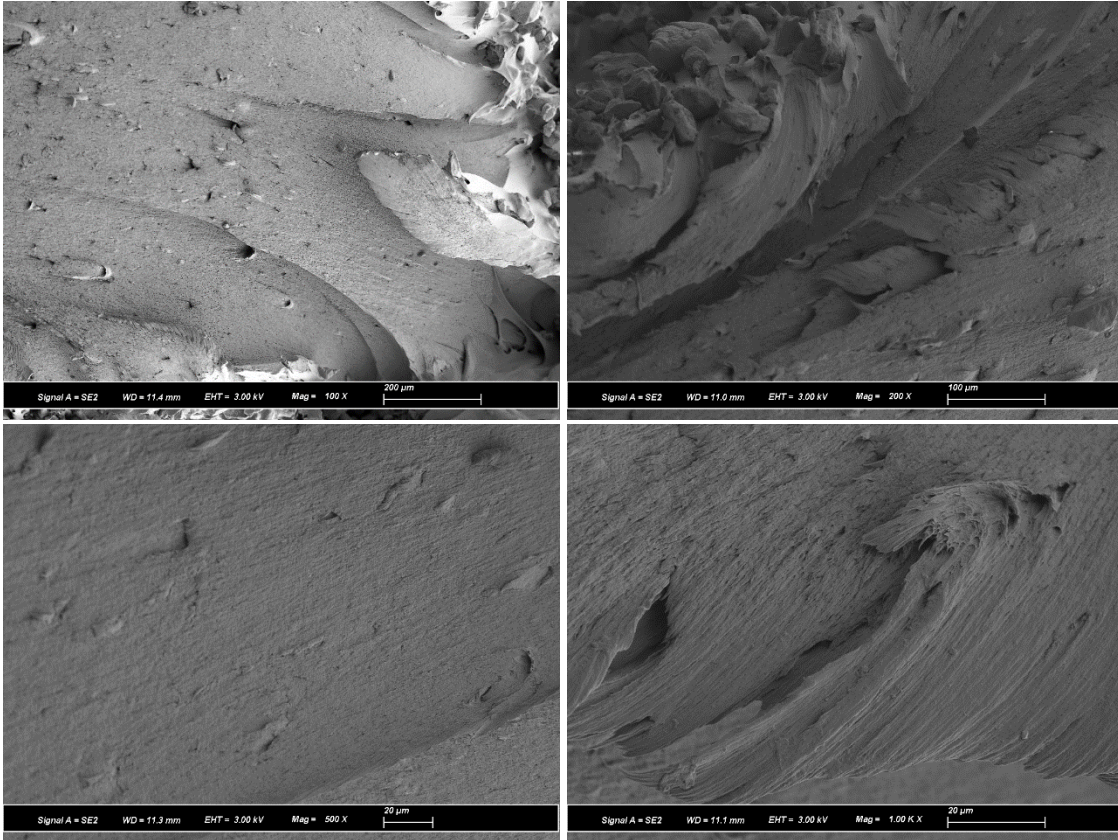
Selected tensile fracture surface images of A_{N11} printed samples.
